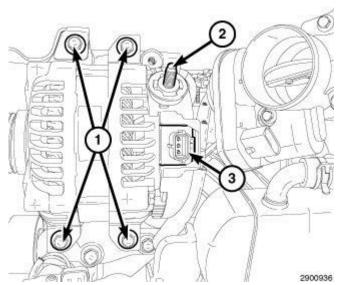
Generator Bolts & Connector Courtesy of CHRYSLER LLC
